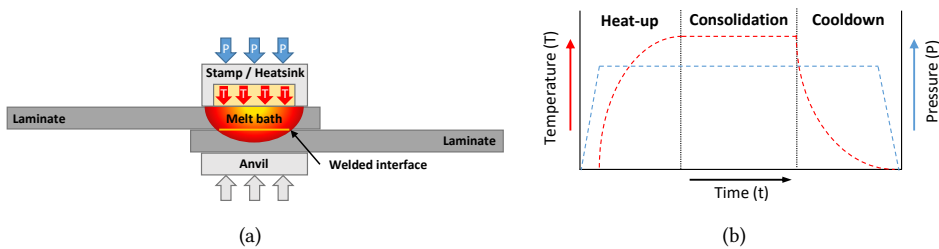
Conduction welding process: a) Schematic; b) Typical manufacturing process cycle.
